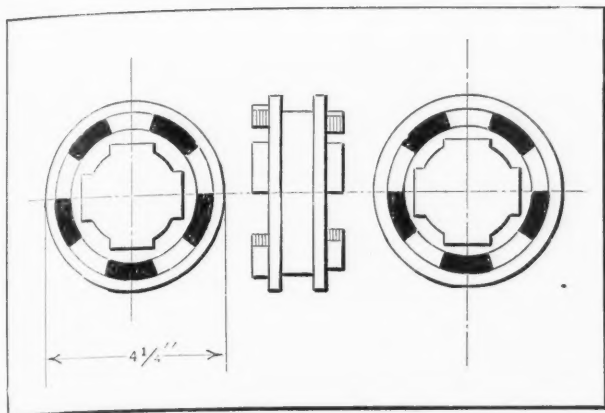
Clutch Milled with Equipment Shown in Fig. 9
